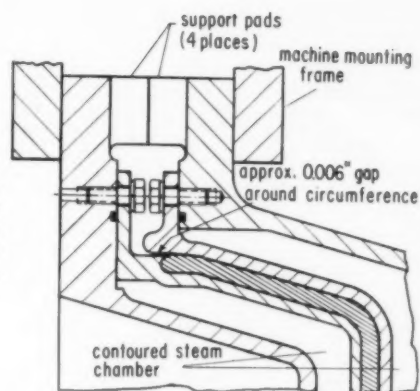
Mold land design for contoured steam chamber mold made by either casting or machining. Clamp force is borne by support pillars and land is made thin to facilitate escape of air and excess steam used for pre-heat and fusion.
